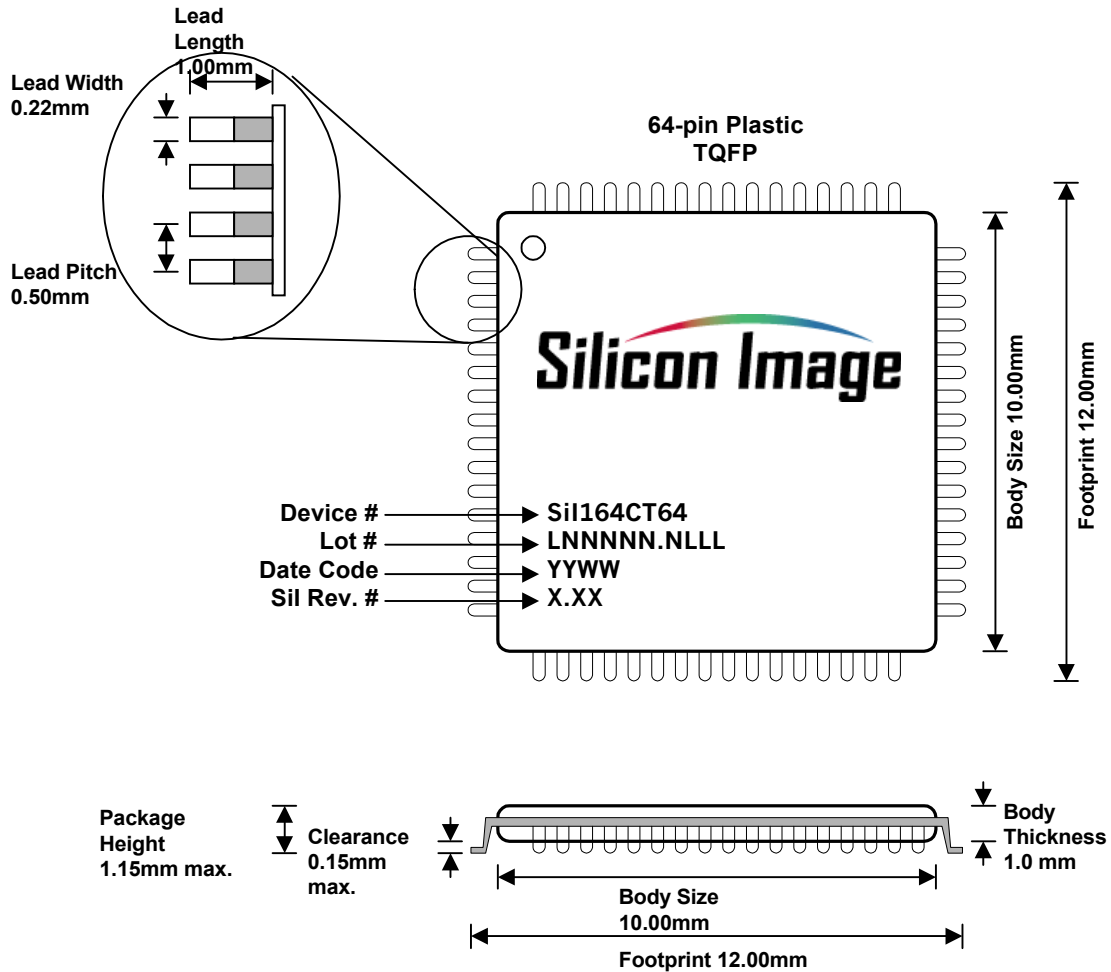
64-pin TQFP Package Dimensions (JEDEC code MS-026ED)
